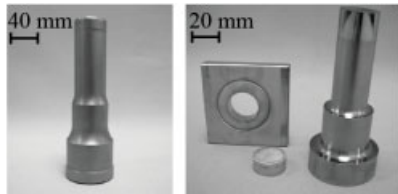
Typical metal forming tools: punch tool for cup backward extrusion (left), workpiece and cutting tool for fine blanking (right).
